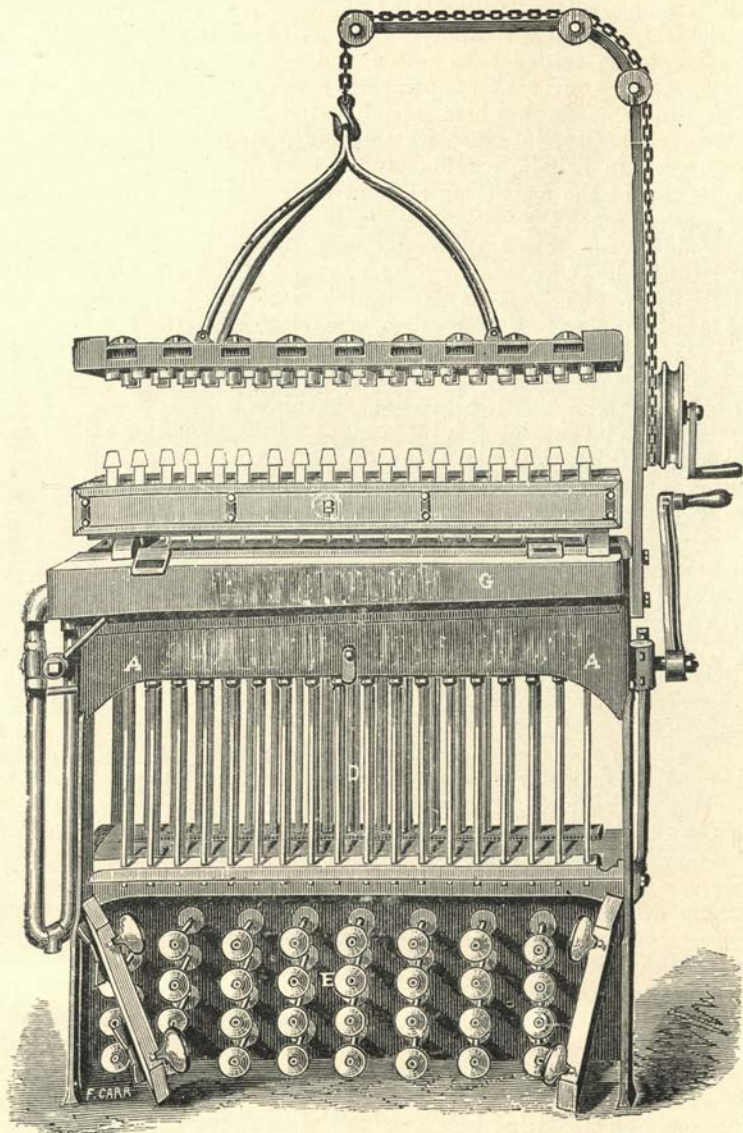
Machine for Moulding Self-Fitting Butt-End Candles.
